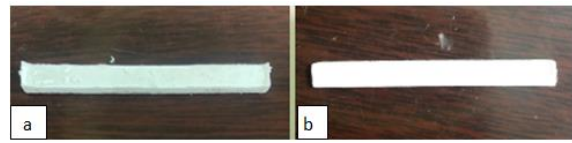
show compacts specimens for fracture test (a) before sintering, (b) after sintering with surface finishing (grinding and polishing).
